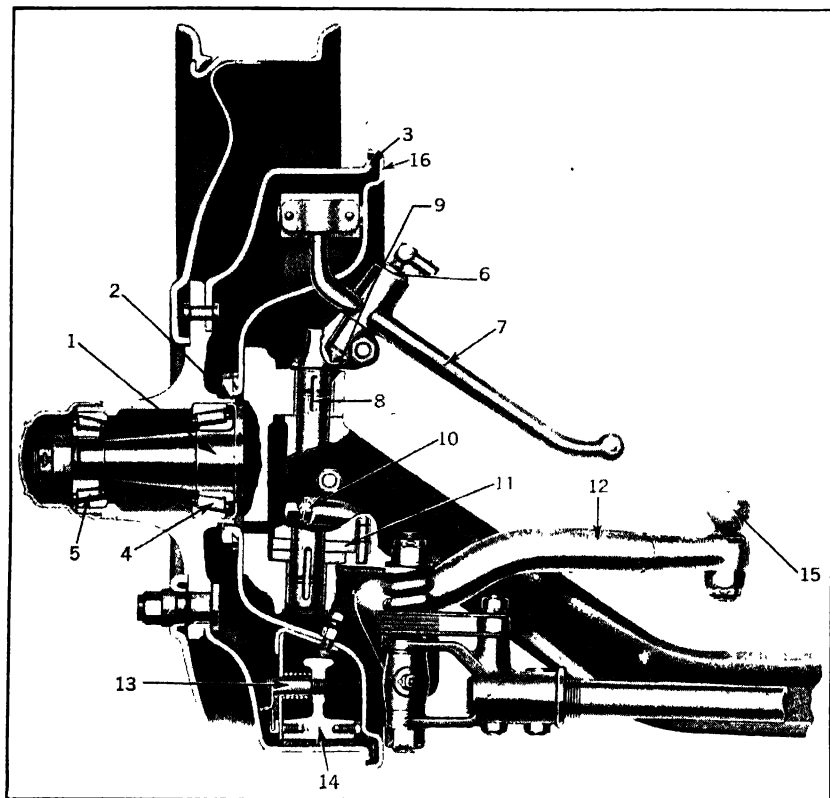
Front Axle and Steering-knuckle. (Nash, 1928)
